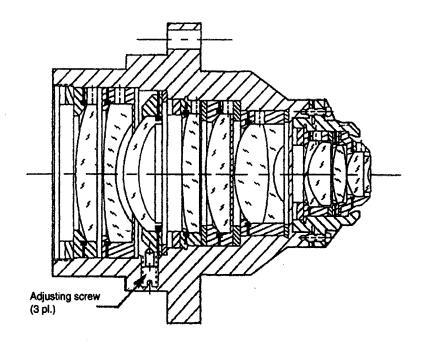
Sectional view of a lens assembly with one element acting as an aberration compensator for performance optimization at final assembly. (From Vukobratovich.¹³)
